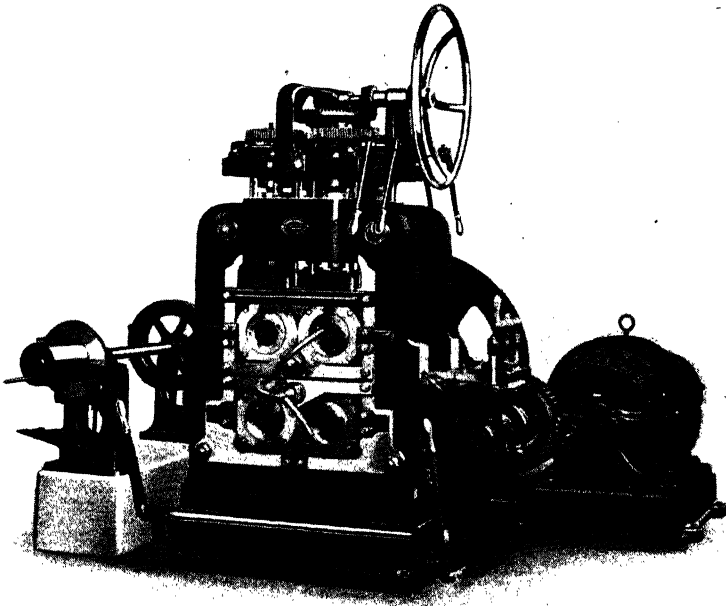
A “Cluster” Mill for Rolling Fine Gauge Strip.
